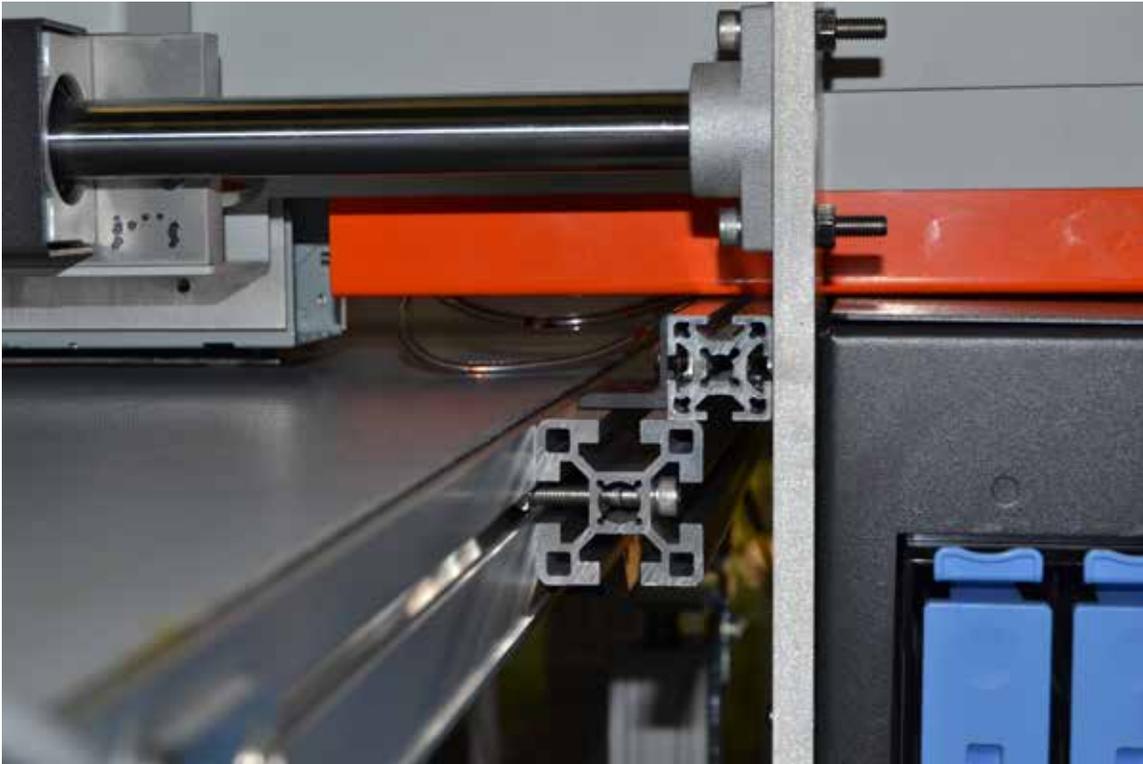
Extrusion with L-brackets attached rests on the mounted 40x40mm extrusion.
